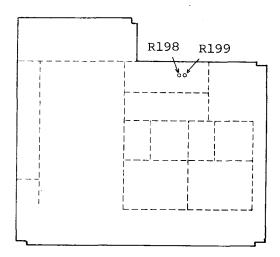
LOCAL Printed Circuit Board (Z4) Shield Cover
